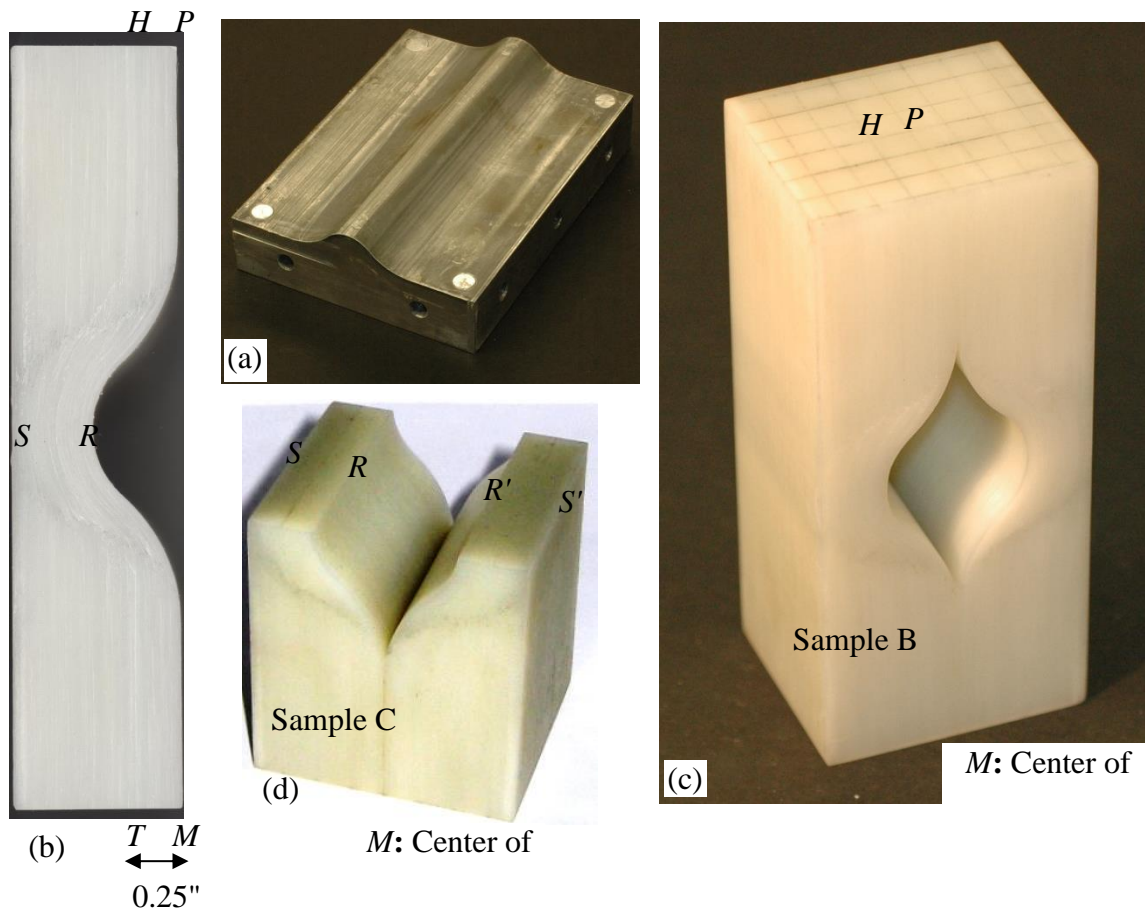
Sample fabrication (a) aluminum mold, (b) resulting composite after being hot-pressed, cooled, trimmed, and its surface machined, (c) sample B, (d) sample C.
